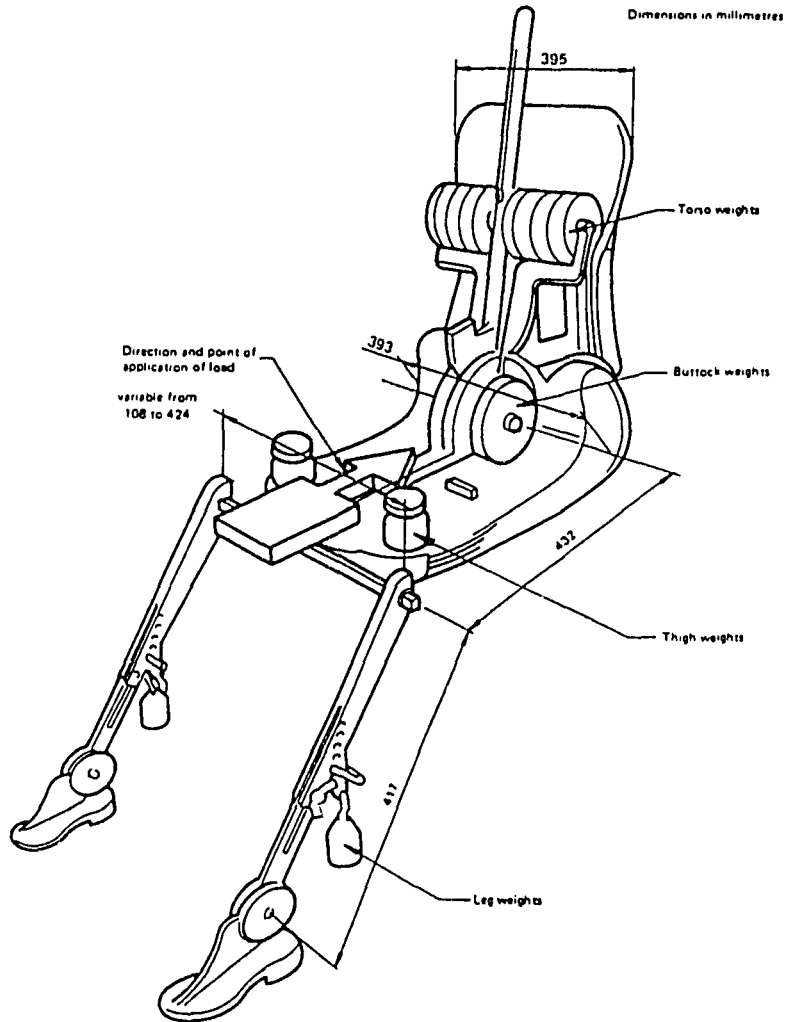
Dimensions of the 3-D H machine elements and load distribution
